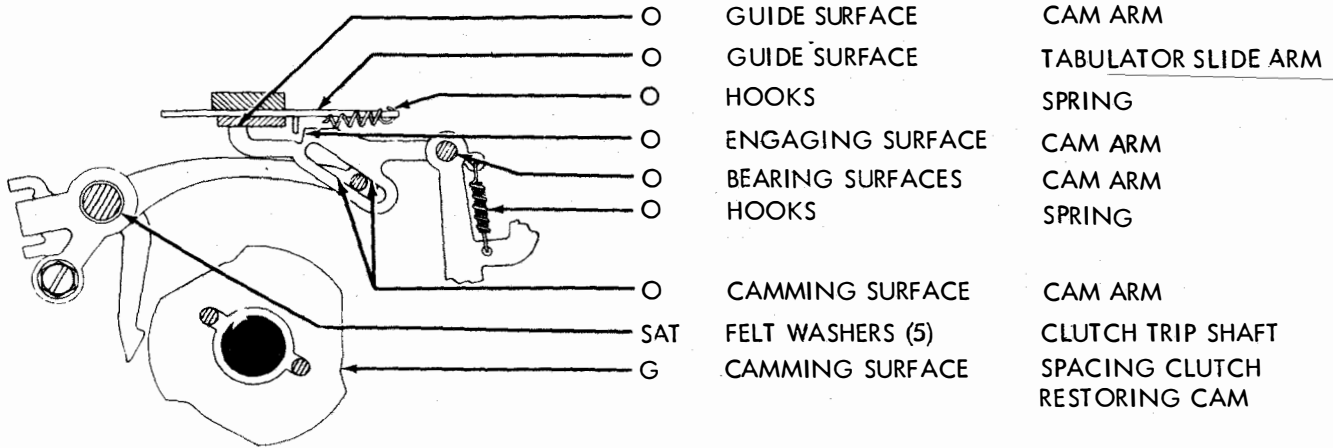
Spacing Clutch Mechanism, Right Side View
